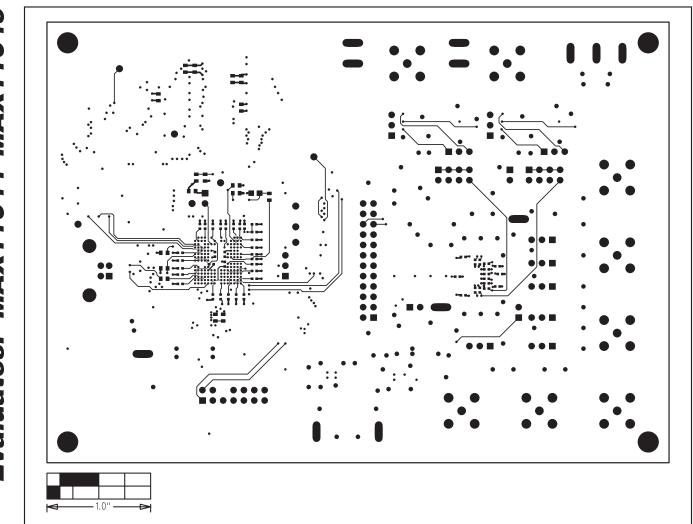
MAX11046 EV Kit PCB Layout—Solder Side
